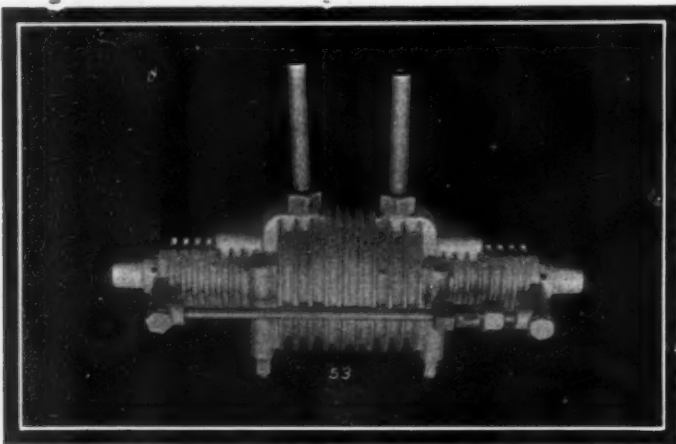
General view of the Bi-plex power tire pump, which utilizes the force of the explosion stroke to impart power to the pump piston
